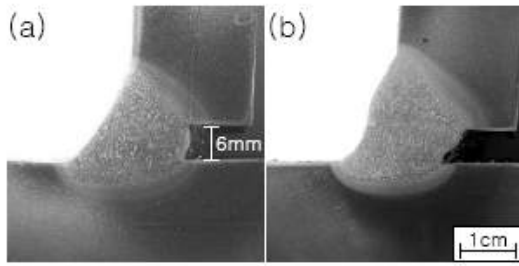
Macrostructure of fillet welding (a) with No 1 FCW, (b) with No 10 FCW
